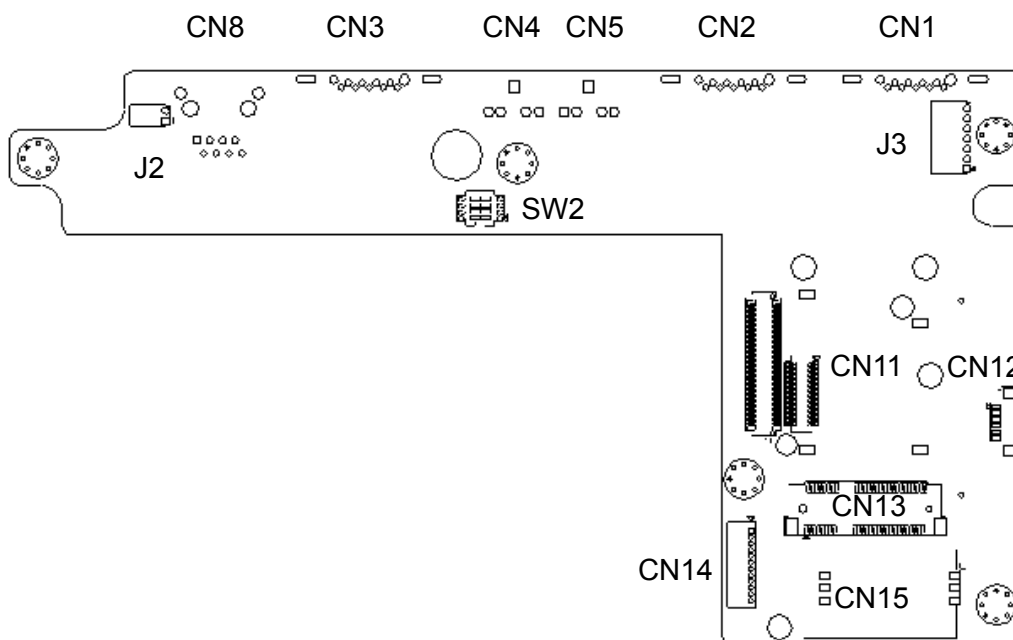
Locations of jumpers and connectors on bottom side of the daughter board
